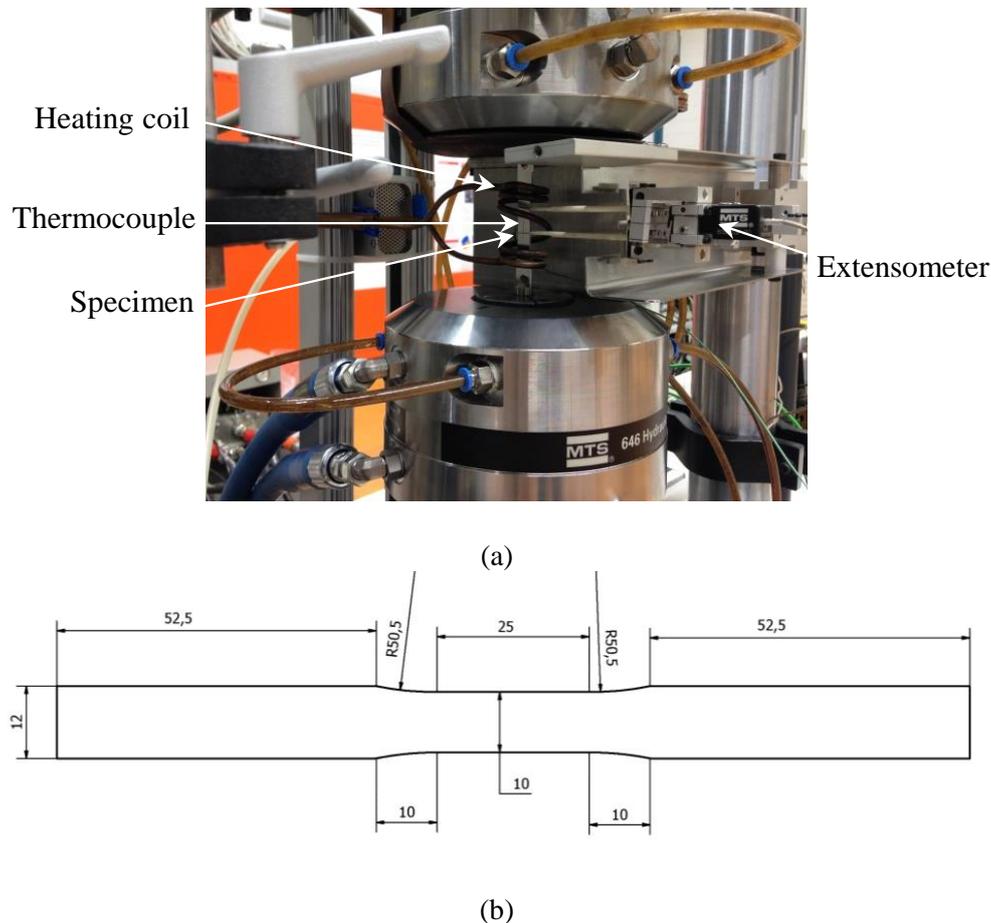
(a) Testing equipment, (b) dog bone specimens with 1.5mm thickness (dimensions in mm).
